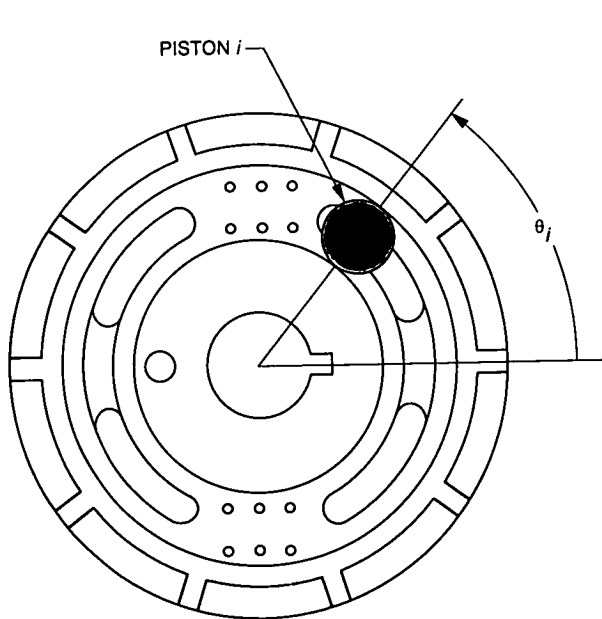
Valve plate sealing surface of a bent-axis hydraulic piston motor and piston angle relative to the valve plate.
